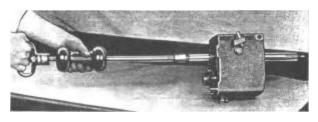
Removing Mainshaft and Rear Bearing— J-352 Shaft Puller, J-778 Adapter
